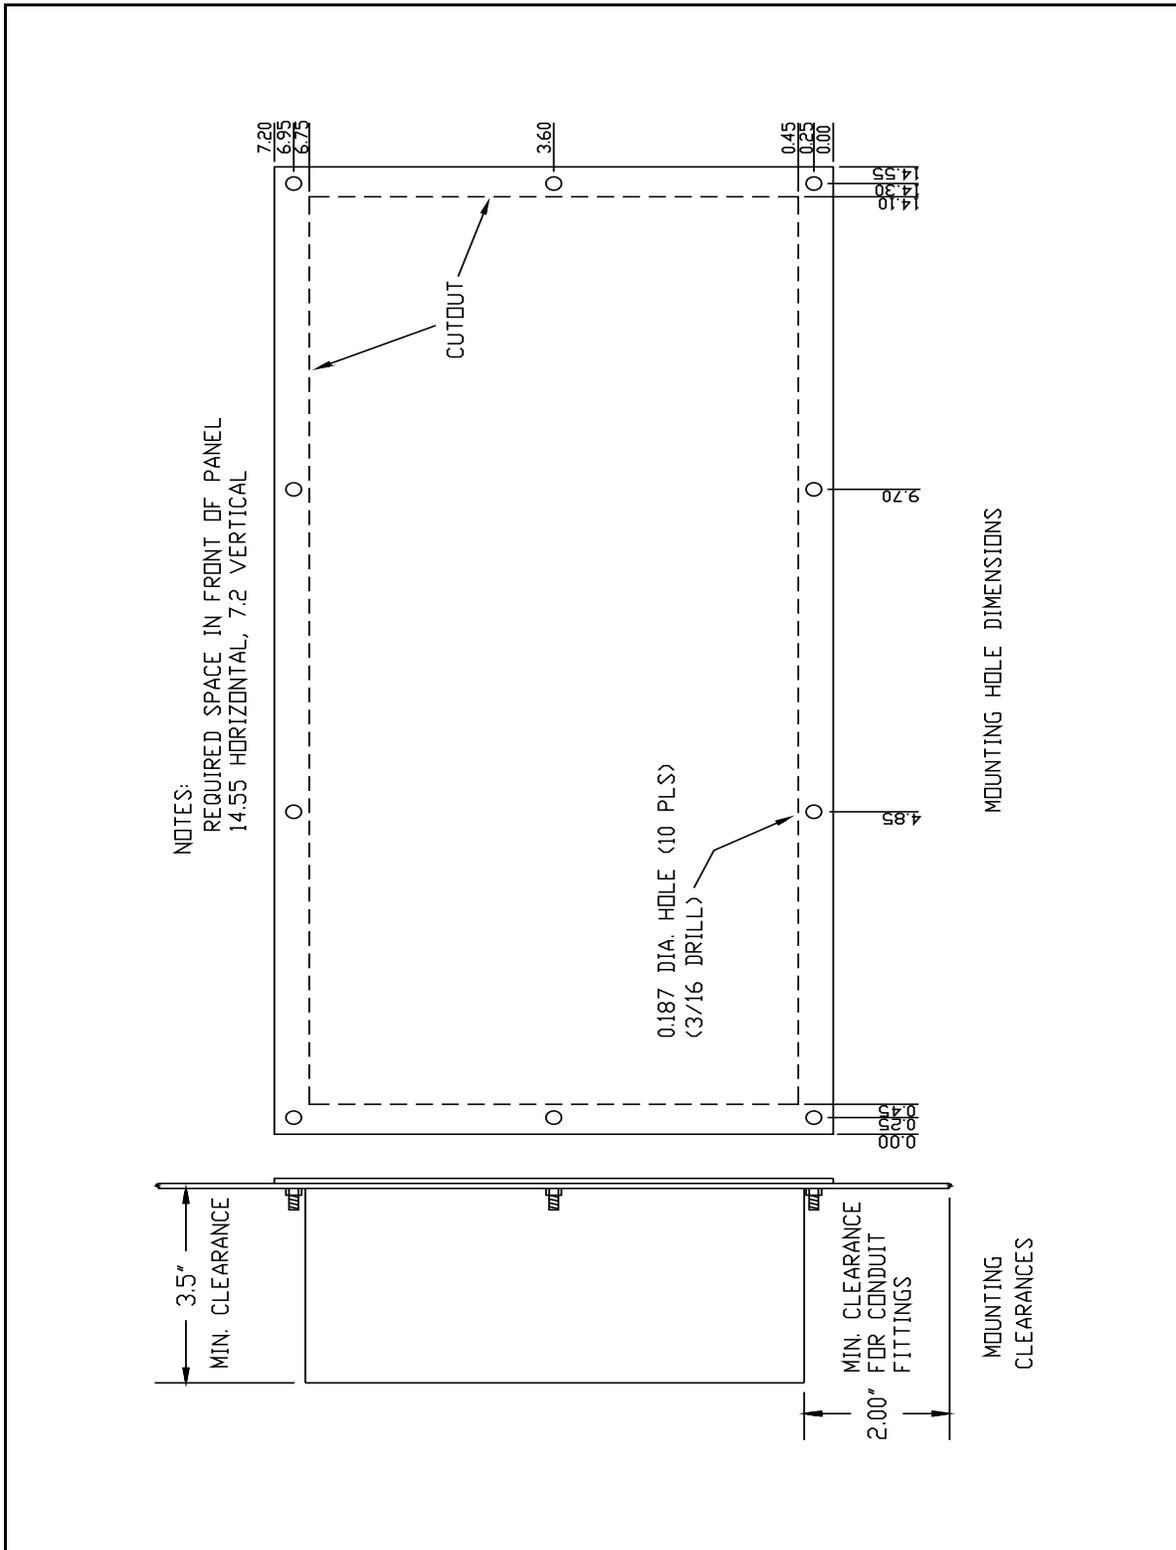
System 1100 Remote OIT Mounting Dimensions.
